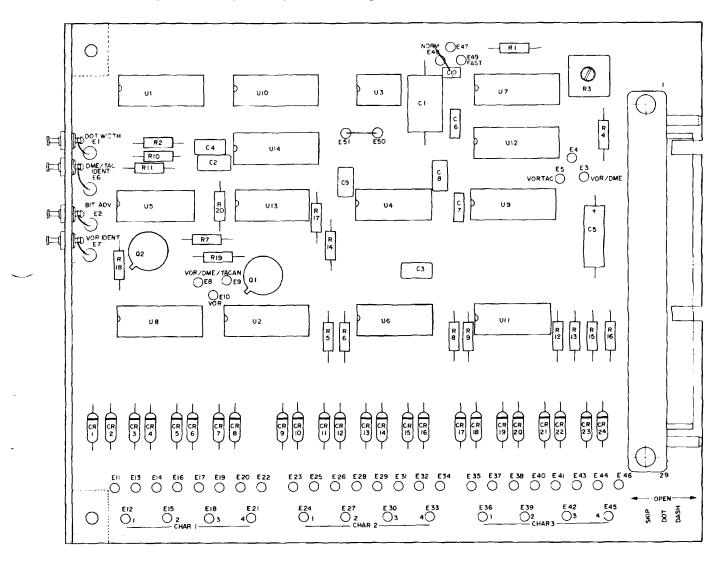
Ident Keyer Circuit Card Assembly, 1A4A1 Parts Location Diagram
